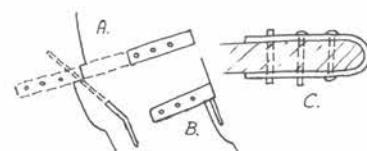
Fitting the pintles to the rudder. A, the pintle pin is driven obliquely into the rudder edge and the strap (Model Shipways catalog #931) fitted over it; B, the completed assembly; C, a sectional view of the strap, showing stages of riveting.
